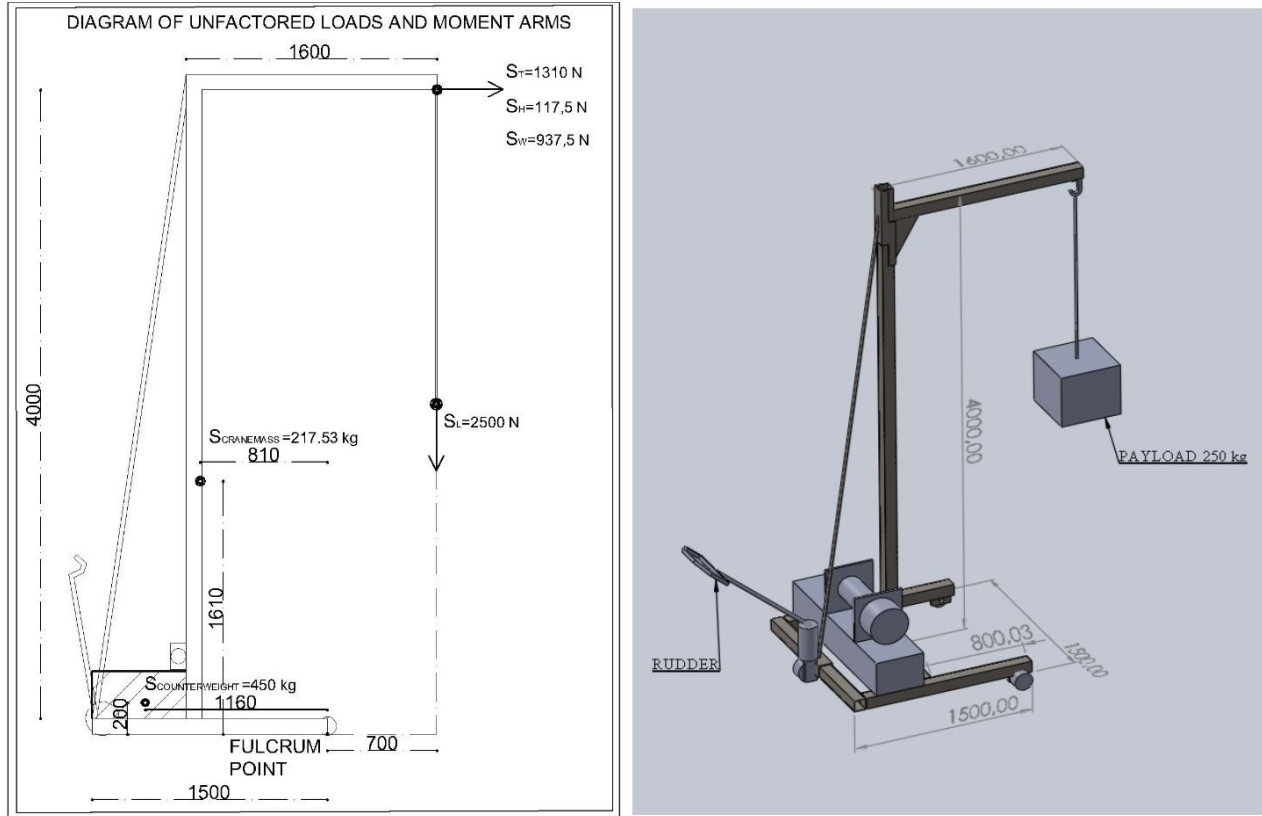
Shop Crane Dimensions, Structural Sections and Design Loads.
